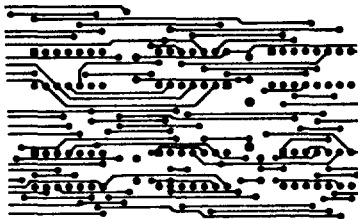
PCB LAYOUT AFTER CORNER CUTTING
